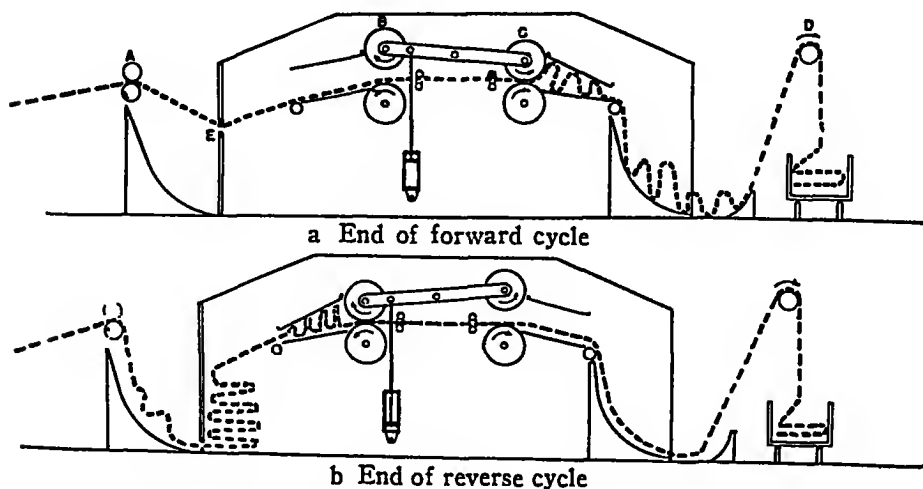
Continuous fulling mill (Courtesy James Hunter Machine Co)
